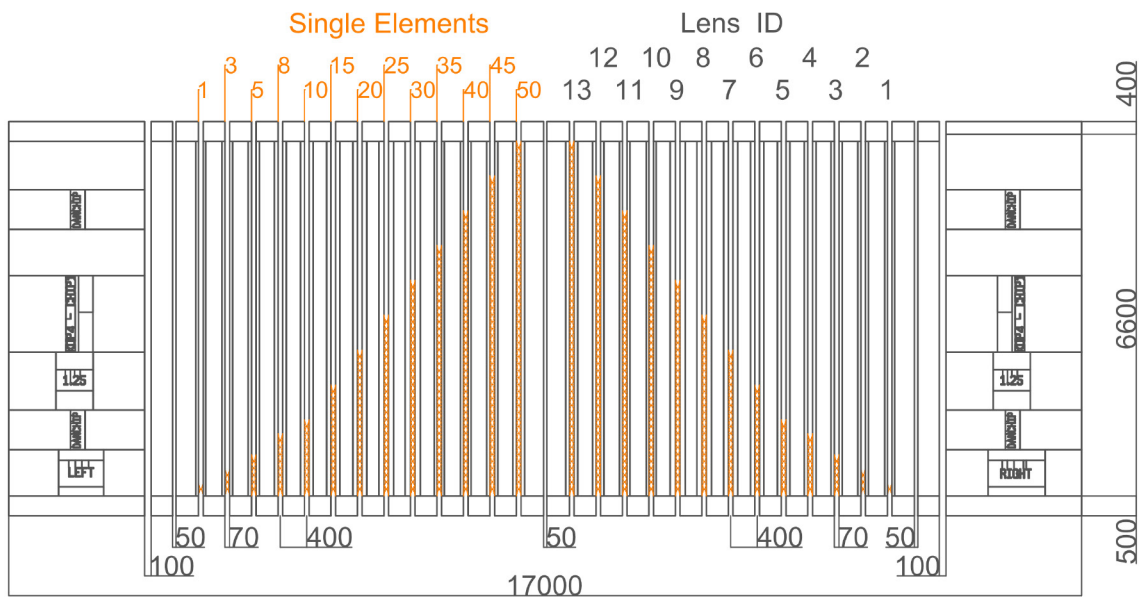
Technical drawing of a lens chip XOPTIX4. The dimensions are given in units of micrometers.
